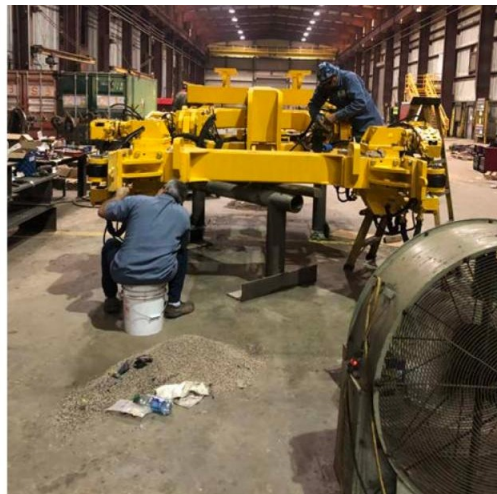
LMI technicians performing final assembly and component integration at the Broussard facility prior to load-out
